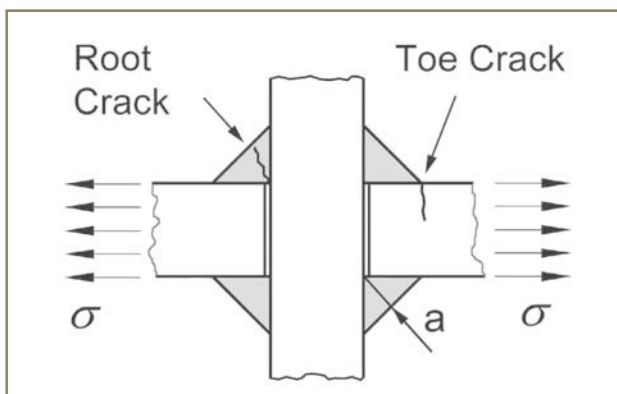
Weld toe and root crack in a cruciform joint
